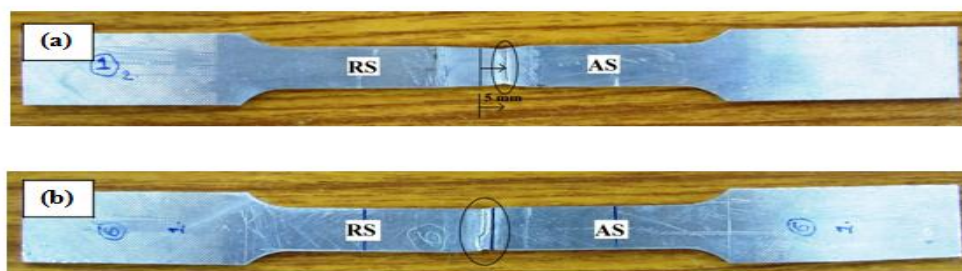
Showing (a) Specimen fractures in HAZ at advancing side (b) Specimen fractures at weld centre line
